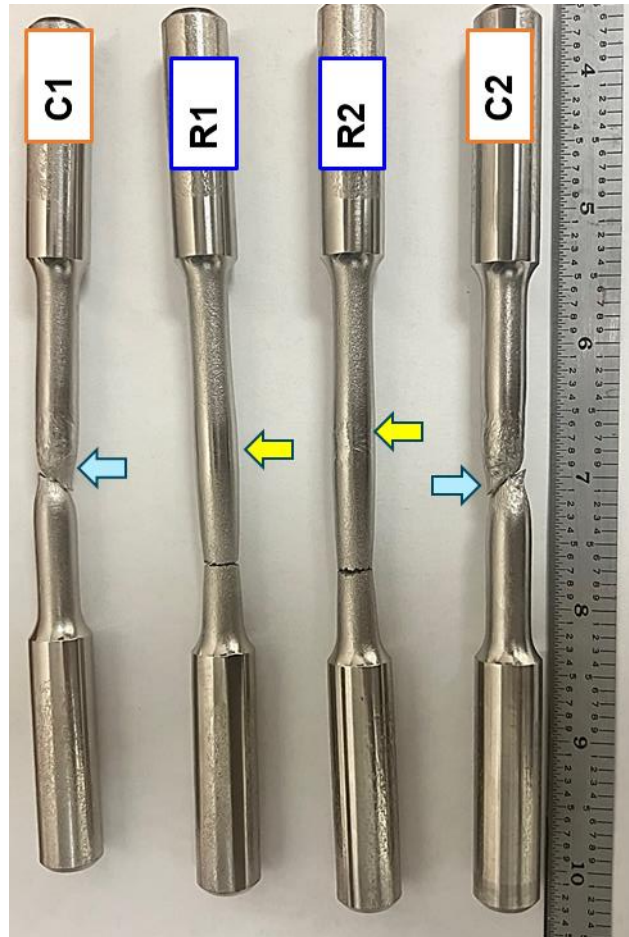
Photograph of the tested cross-weld tensile specimens from production weld W12
